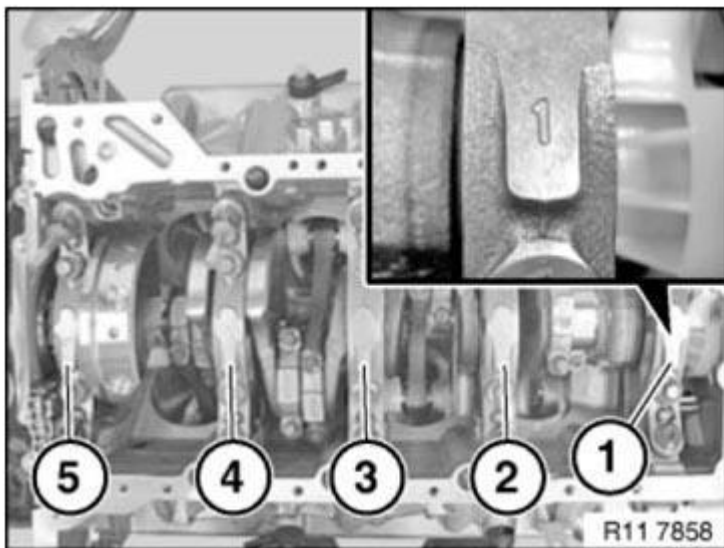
Identifying Main Bearing Caps Marked Numbers
